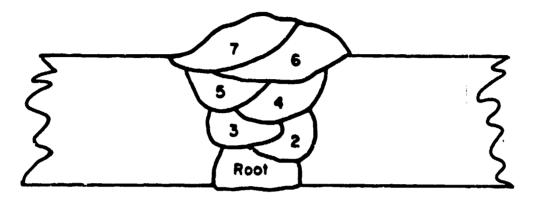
CROSS SECTION OF A SEVEN-PASS GIRTH-BUTT WELD IN A 4-INCH DIAMETER SCHEDULE 80 TYPE 304 STAINLESS STEEL PIPE
